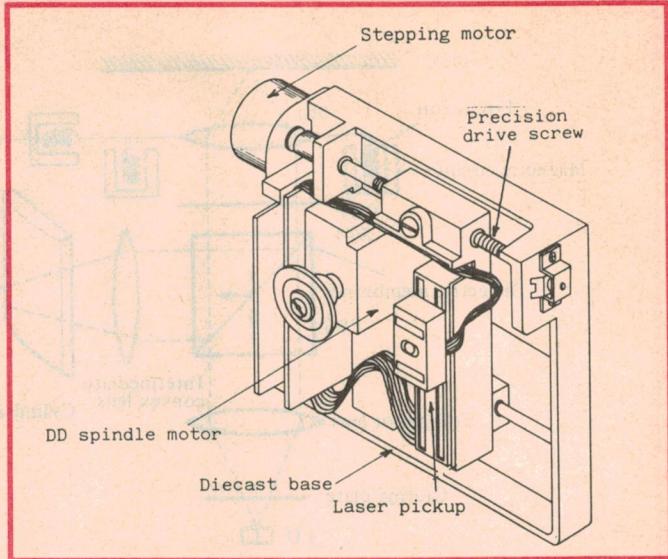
a complete CD mechanism — disc drive, read head drive, laser optics and servo control — housed in a rectangular diecast assembly. (Technics diagram).
